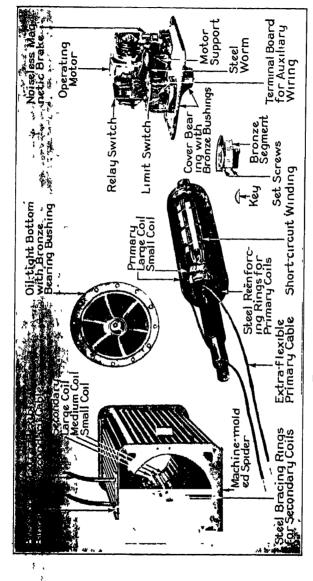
Dissembled Feeder Regulator. (General Electric Company)
